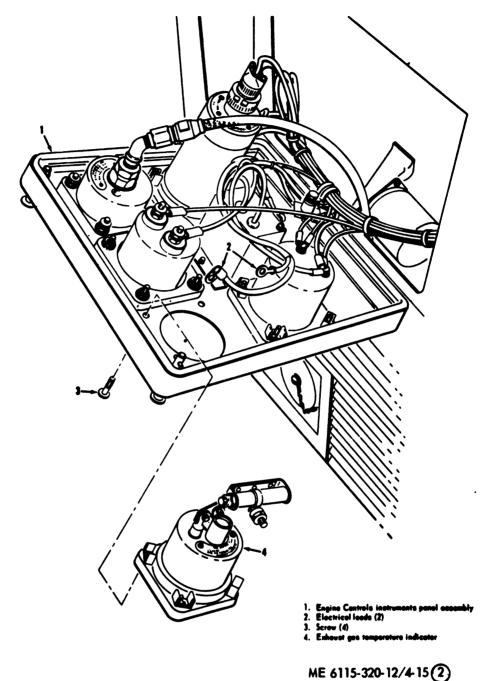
Engine controls instruments panel assembly components, removal and installation (Sheet 2 of 2)
